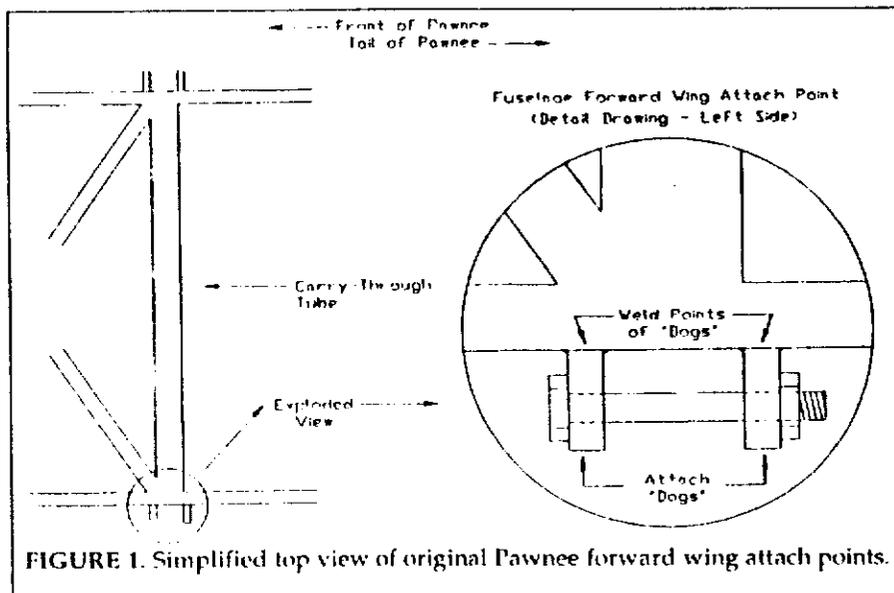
Simplified top view of original Pawnee forward wing attach points.
